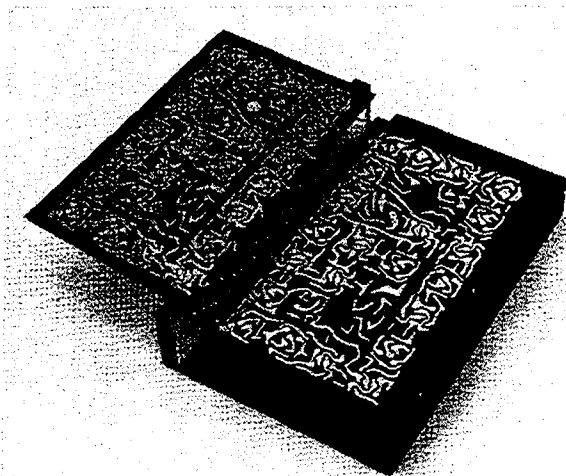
Assembly using dot electronic parts and book type of interconnection design.
